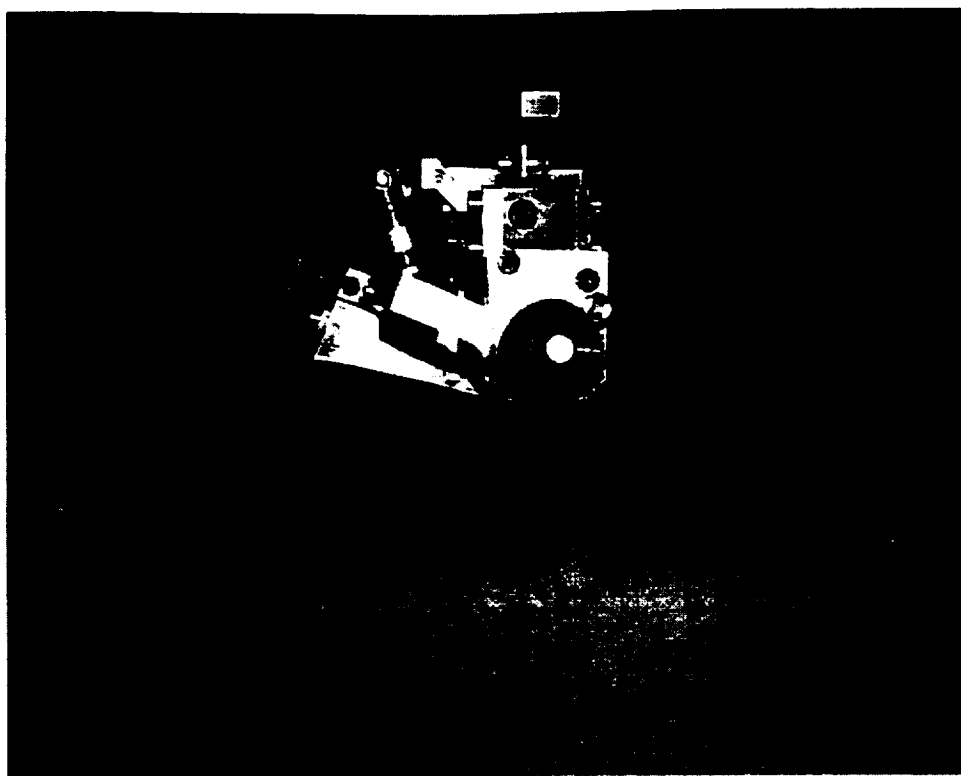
Trailing shoe in retract position on cylindrical placement tool surface.
